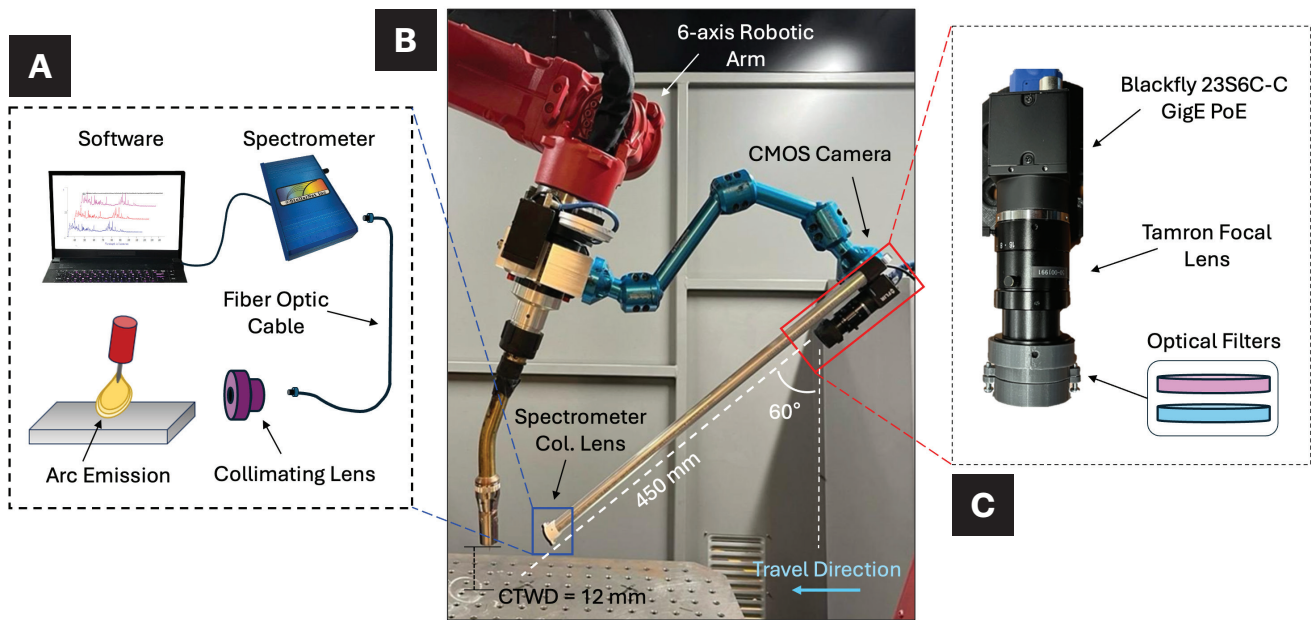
A – StellarNet spectrometer setup schematic; B – welding gun with spectrometer attached via fiber optic cable mounted (aluminum rod) on Blackfly’s swivel arm mount. The swivel is attached to the upper part of the welding gun with a CNC machined aluminum block to be used as a stable bracket; C – FLIR Blackfly 23S6C color camera, focal lens, and filters.
